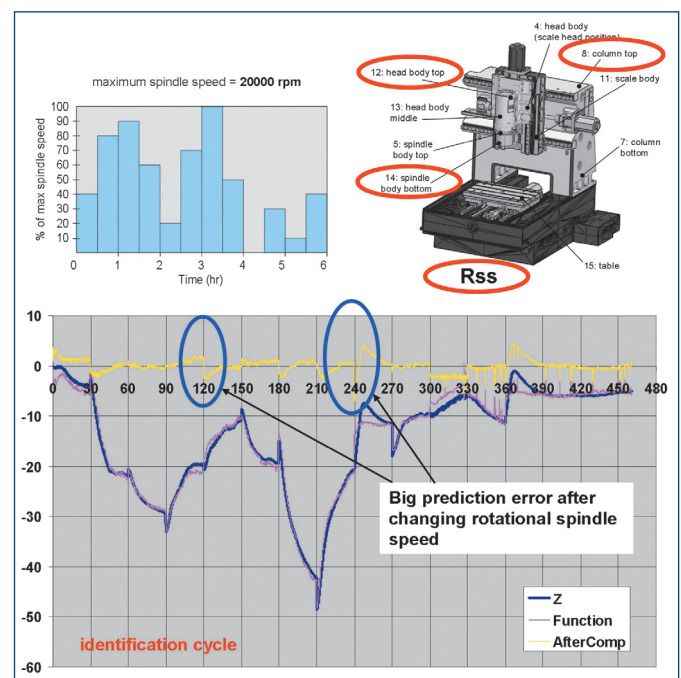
Experimentally identified and predicted machining centre spindle displacement and theoretical compensation accuracy.
